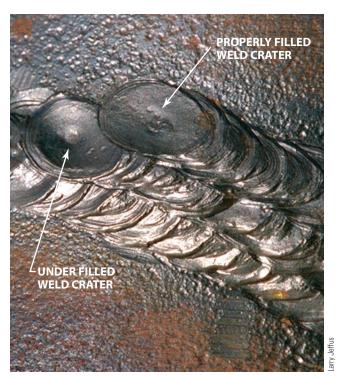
The weld crater should be filled to prevent cracking and cleaned of slag before restarting the arc.
